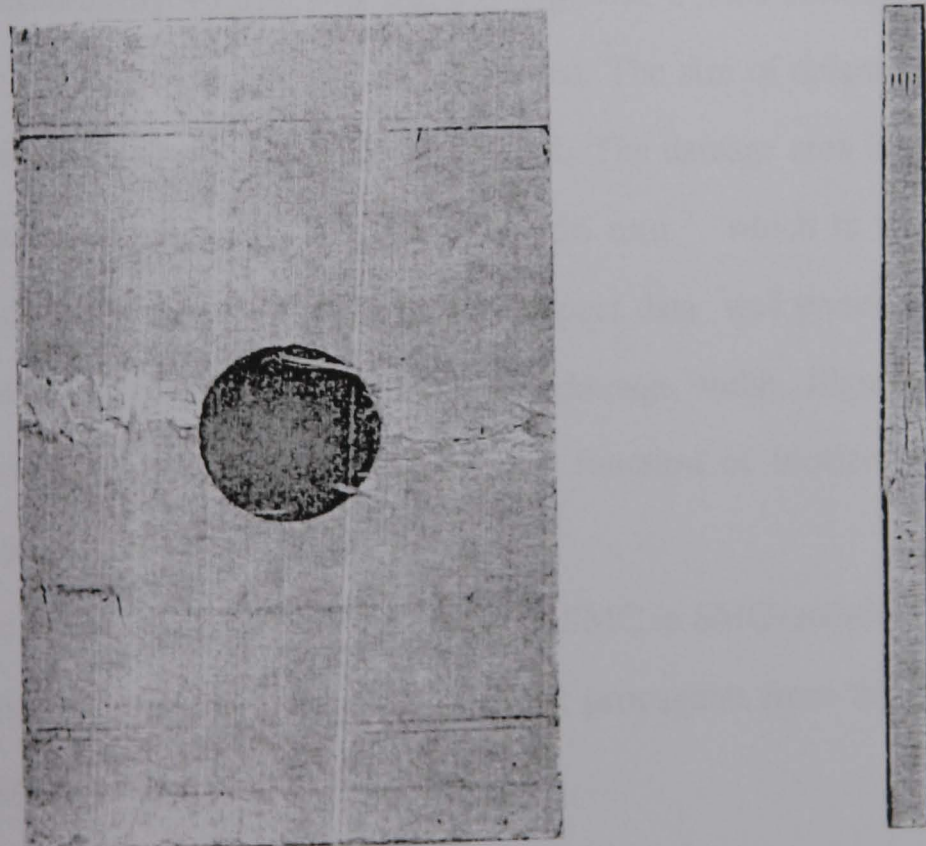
Typical fracture of compressive specimen with a 20 mm diameter drilled hole.
